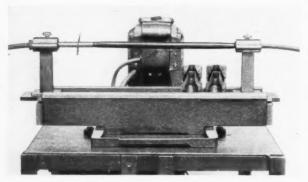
The 2 Parts of the Extrusion Die Which Apply Paragutta to a Cable Joint Rest on Top of the Machine
